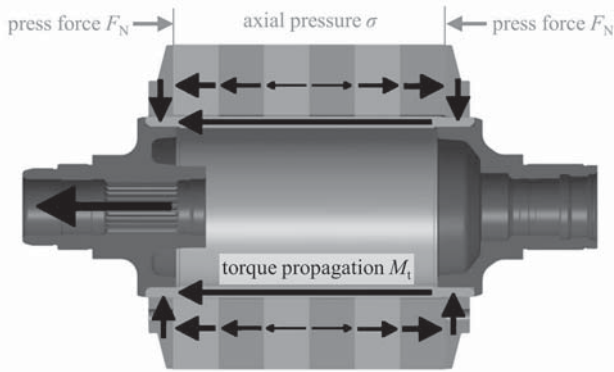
Axially clamped rotor assembly according to DE102014106614.
